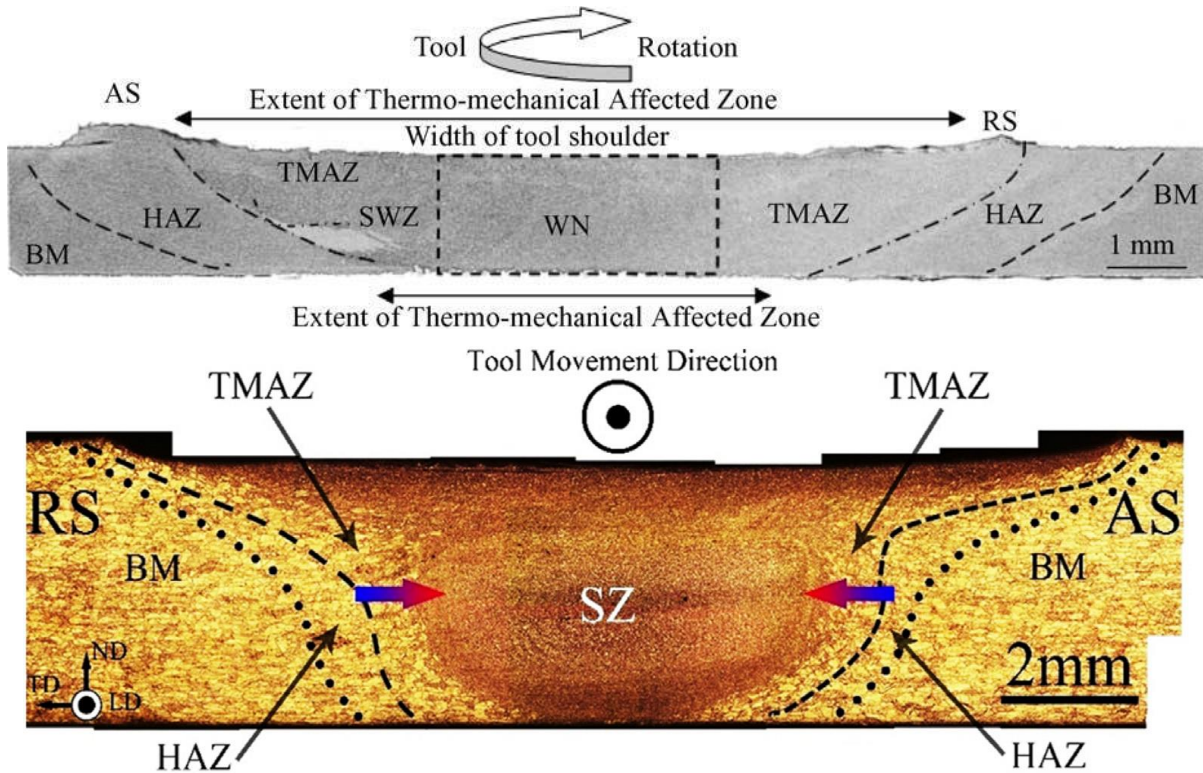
Macrostructure of a typical FSW weld [61]
